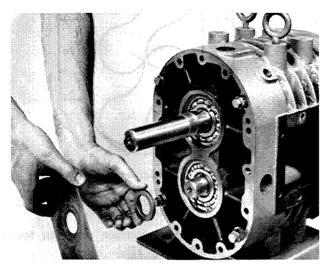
ASSEMBLING CLAMP WASHER AND OIL FLINGER TO DRIVE END OF IDLER SHAFT
